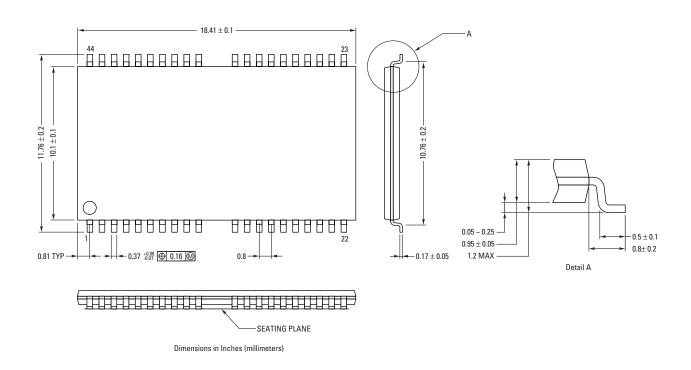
40/44-Pin TSOP (Type II) Package Dimensions
